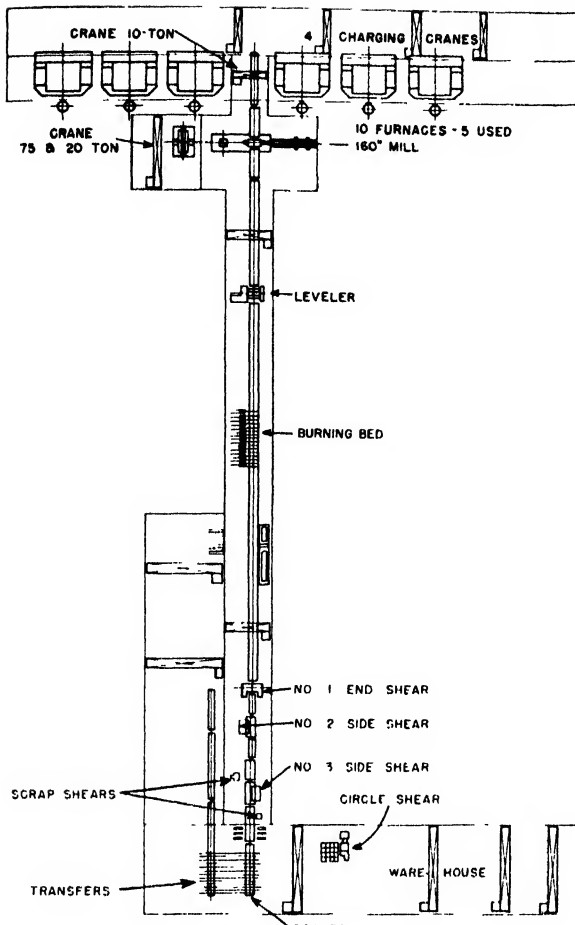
2. Schematic layout (not to scale) of the units comprising the 160-inch plate mill at Gary Steel Works.
